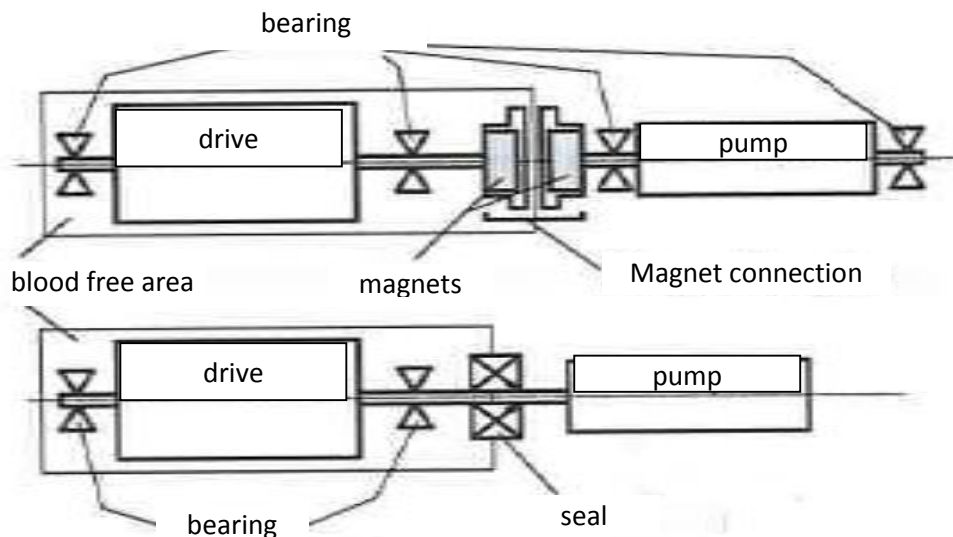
Bearing and sealing concepts for a micro-axial pump with integrated drive
